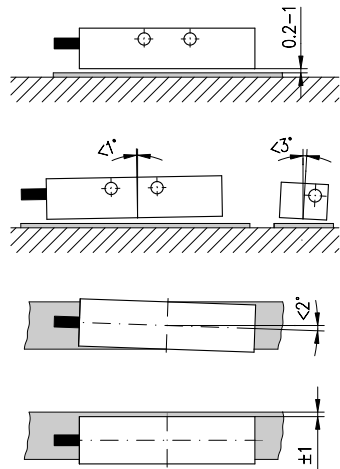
Mounting tolerances, dimensions in mm
